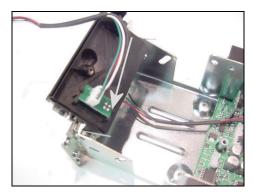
Paper Guide Sensor – PayCheck™ 1, 2 & 3
